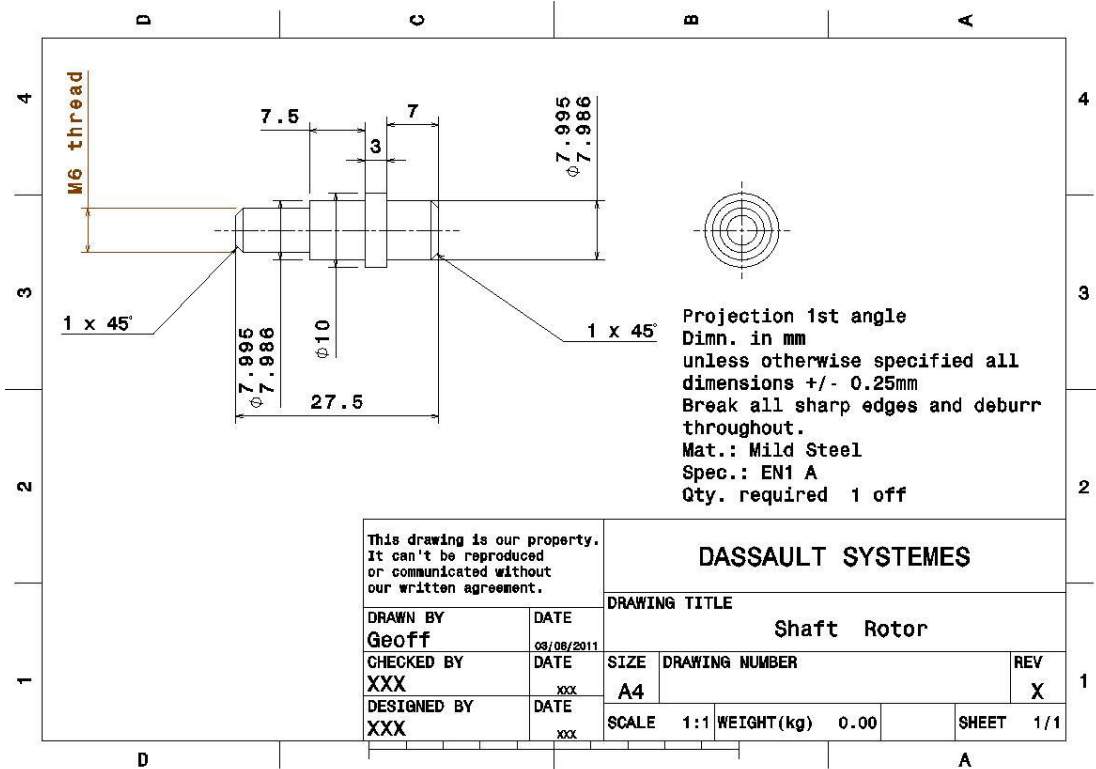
A –Shaft Rotor: Mark II Thermal Motor
